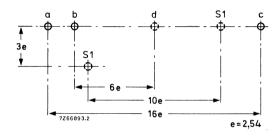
Hole pattern in the printed-wiring board for a single potentiometer (viewed on component side).
